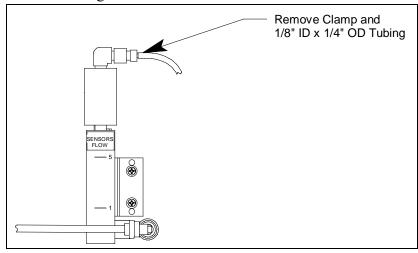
Sensors Flow Flowmeter Clamp and Tubing Removal
